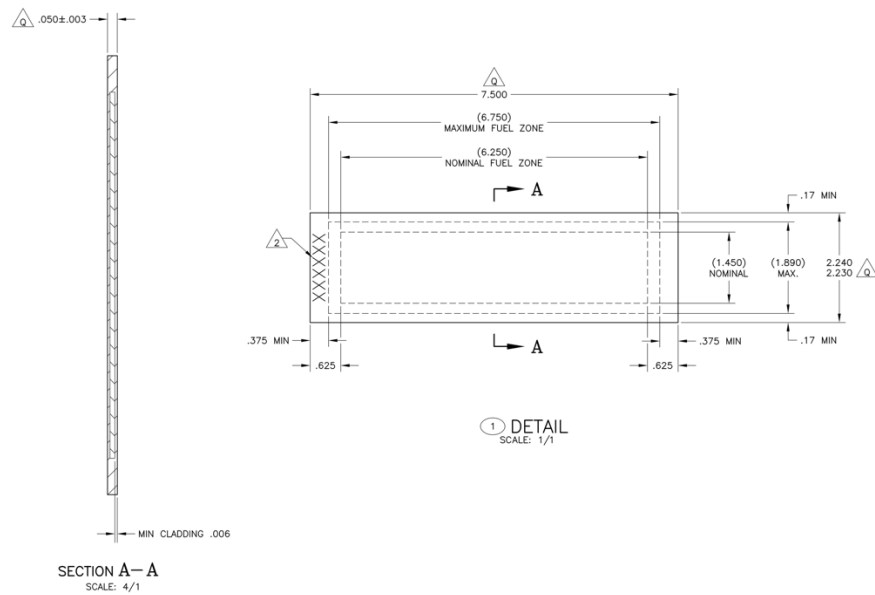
AFIP-4 plate geometry. Dimensions are in inches.
